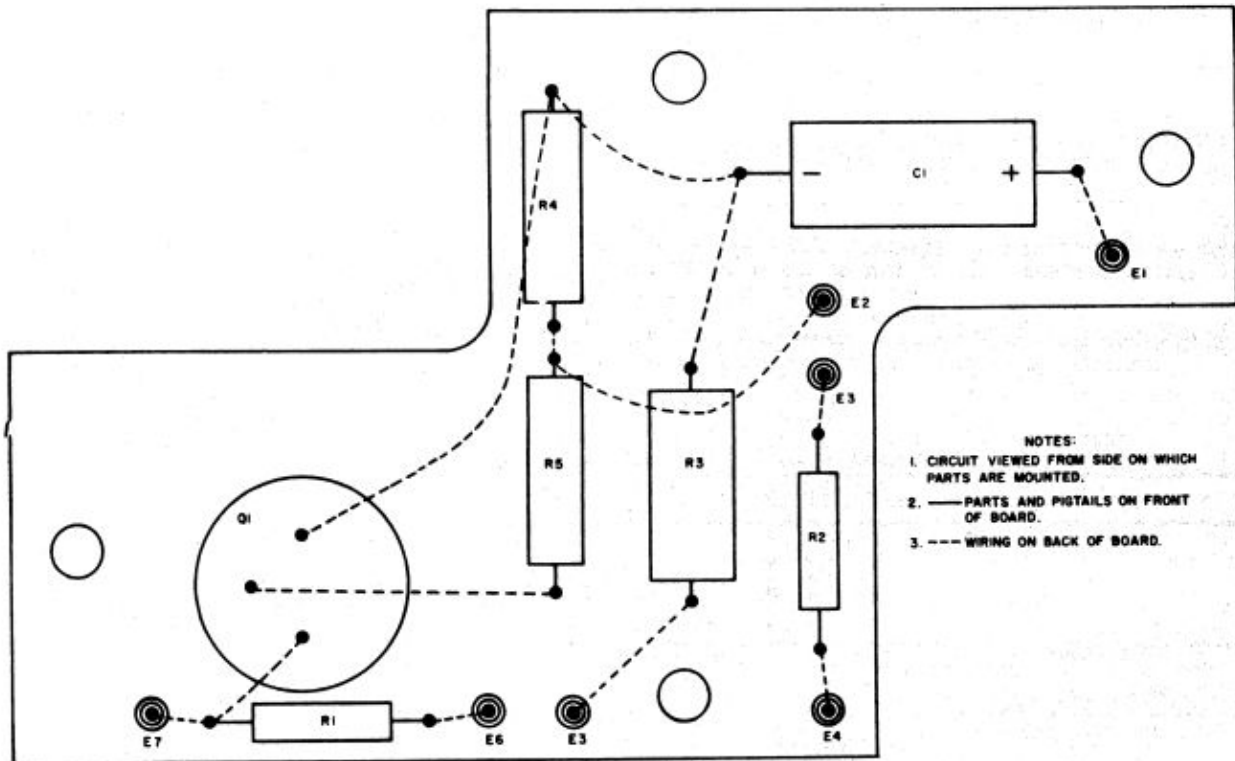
PRINTED CIRCUIT BOARD 2A5A6 - COMPONENT LOCATION (DC-TO-DC CONVERTER - STARTING CIRCUIT)
